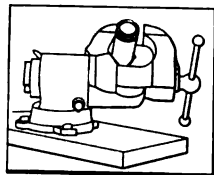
Showing an ordinary vise with a pipe-holding bushing inserted
